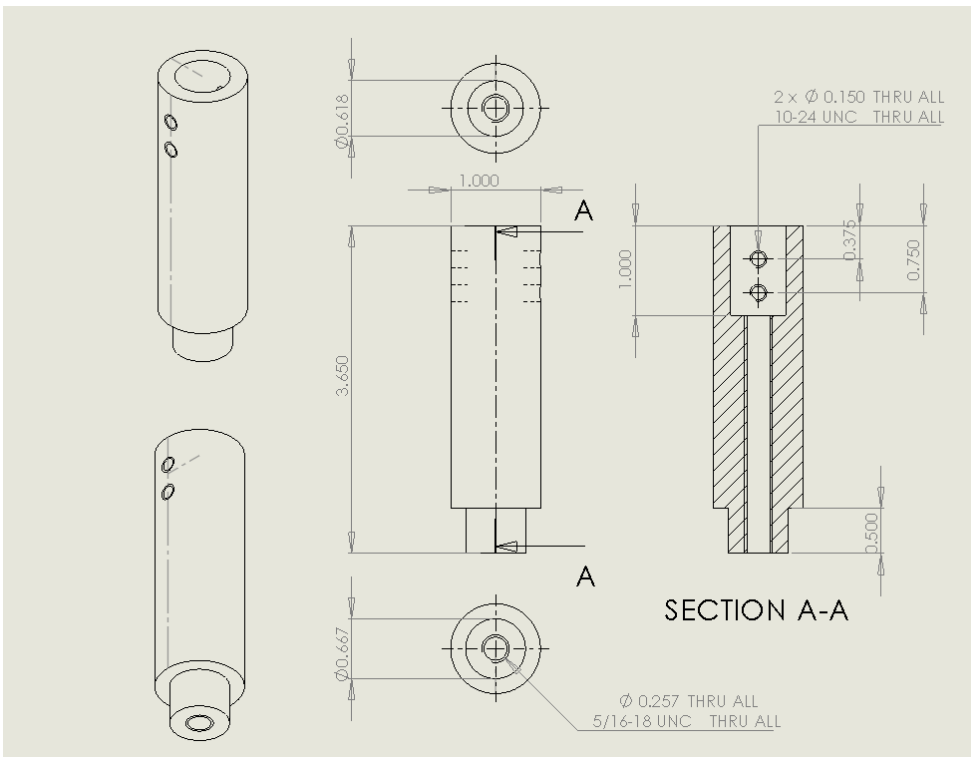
Drawing of coupler that attaches lower housing to adaption assembly
